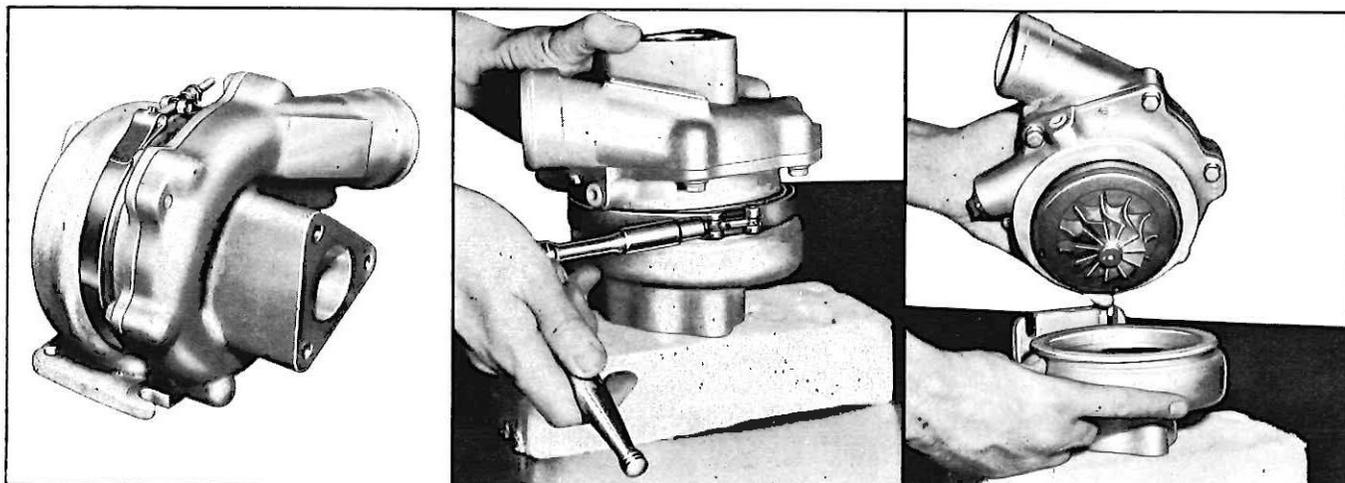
Removal of the Turbine Housing for Installation of Replacement Supercharger
